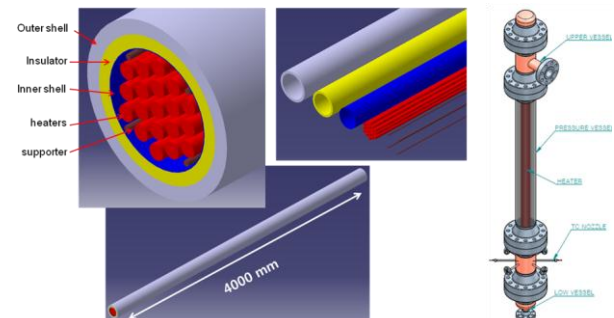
Design of the helium pre-heater (3-D Drawing)
